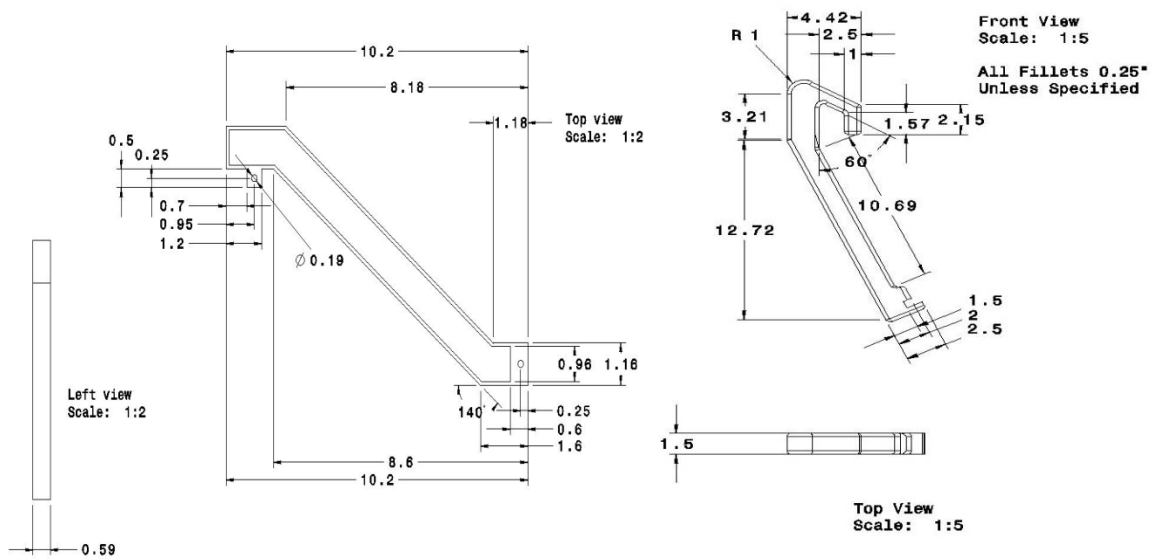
Shown left to right, alpha concept assembly drawings of the “Track” and “Handle”
